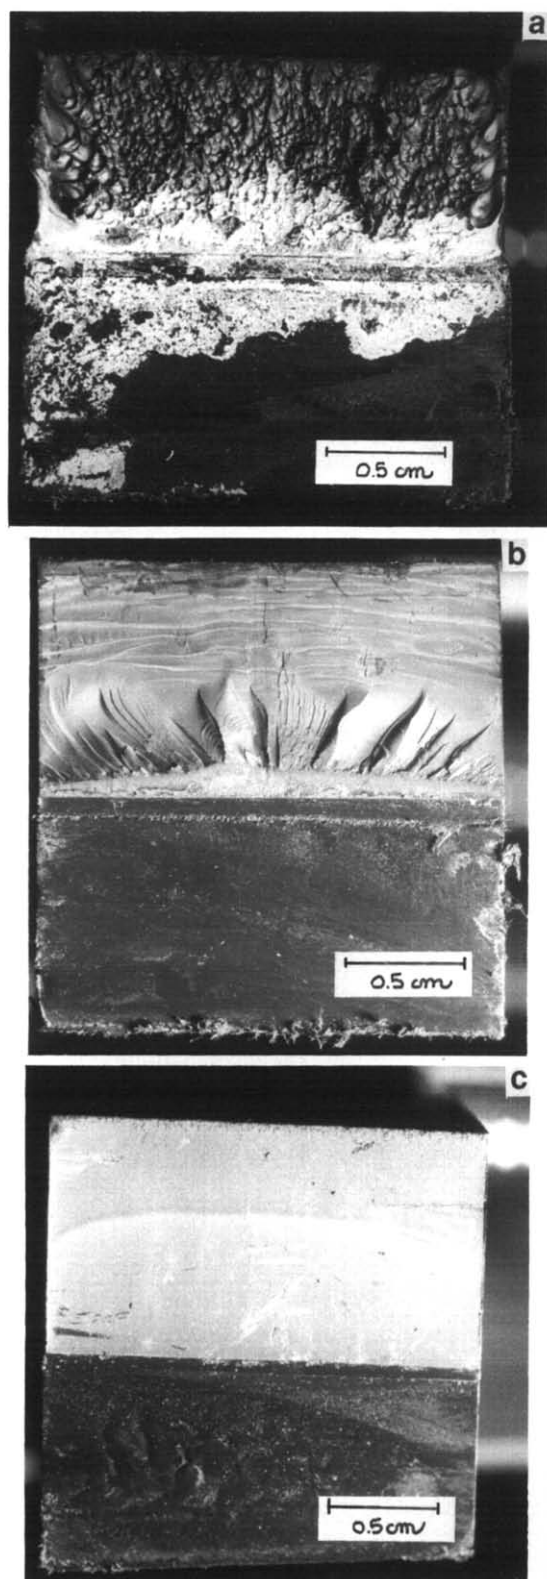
(a) Fracture surface of specimen classified as type A (see text), in which the crack extension is evidenced by the white paint (Δa 3.8 mm); (b) fracture surface of specimens classified as type C (see text), with crack growth extending over a limited zone beyond the machined notch (Δa 1.5 mm); (c) fracture surface of specimens classified as type B (see text), showing a well defined front trace (Δa 8.6 mm)
